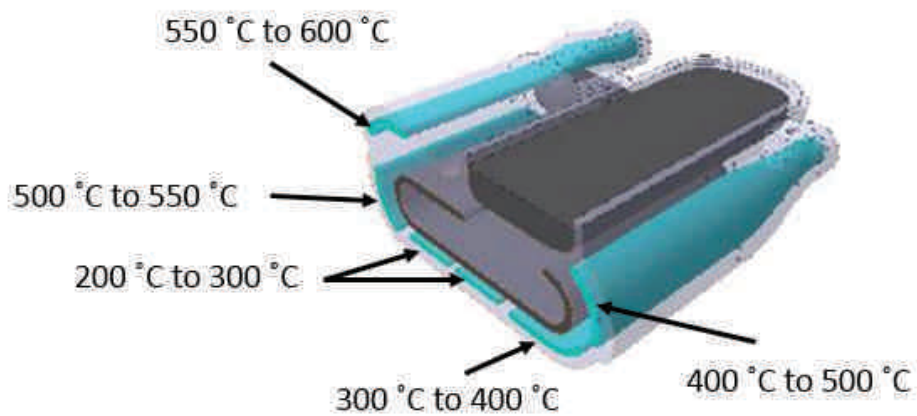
Design of the LIEBE heat exchanger - cut view with the water channels
